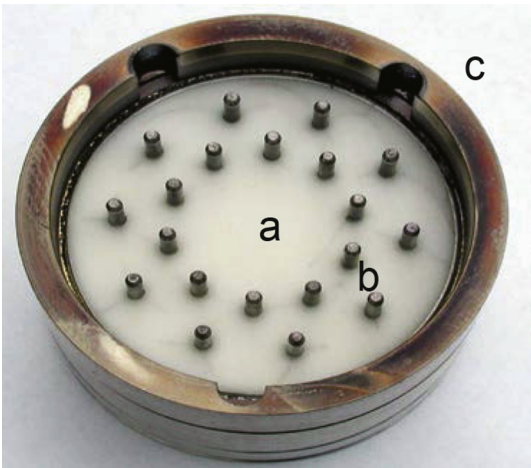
Vacuum-tight interface for a fast exchange of probes: a – aluminium oxide ceramic, b –titanium electrical connectors, c – assembly ring with slots for unmistakable probe mounting. Precision of the unit is better than 0.1 mm and 0.36°.
